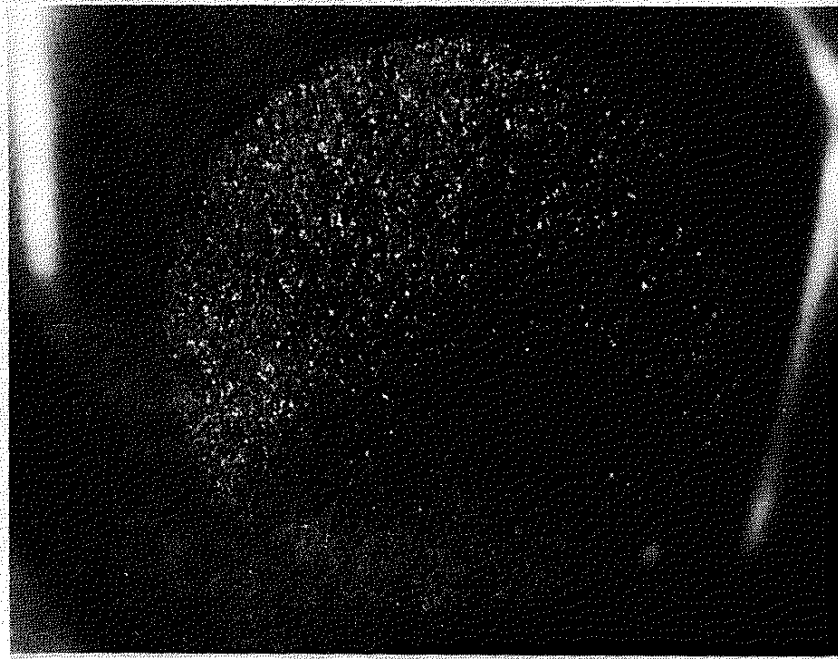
Macrograph of a nodular cast iron (N-LF-10) fracture surface that initiated at a type I flaw. 7X.
